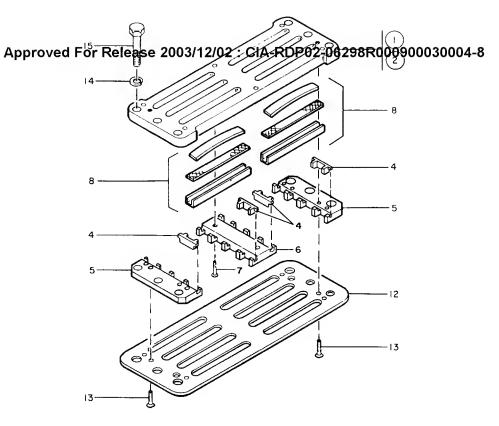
DISCHARGE VALVE [A829] (Used on 9-1/2 x 5, 9 x 7 and 9-1/2 x 7)
